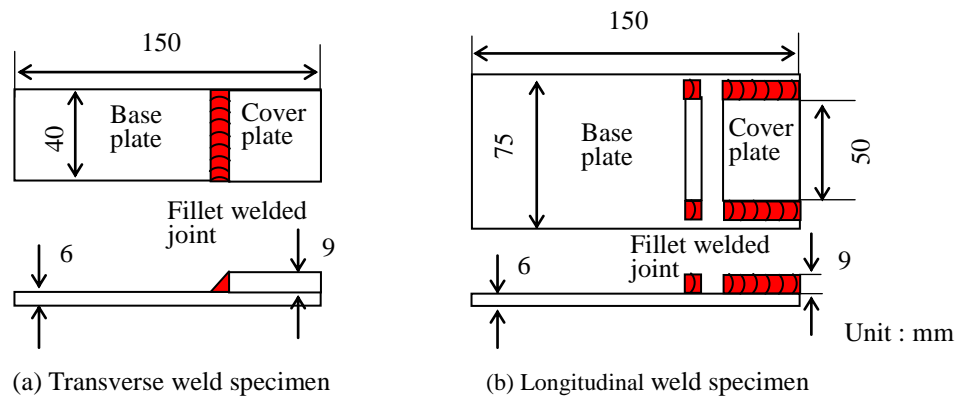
Shapes and dimensions of fillet welded specimens.
